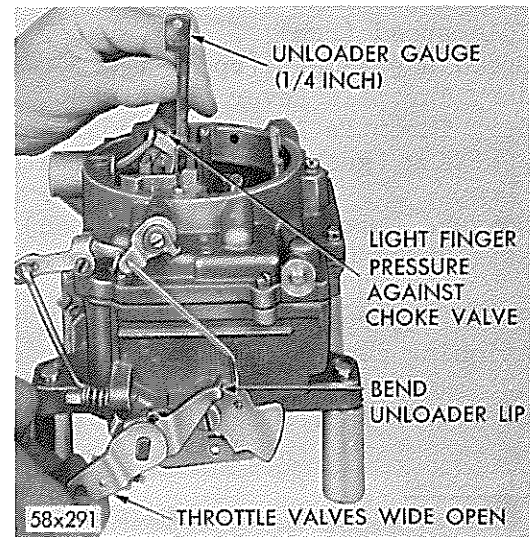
Checking and Adjusting Choke Unloader (Fast Idle Kick)
